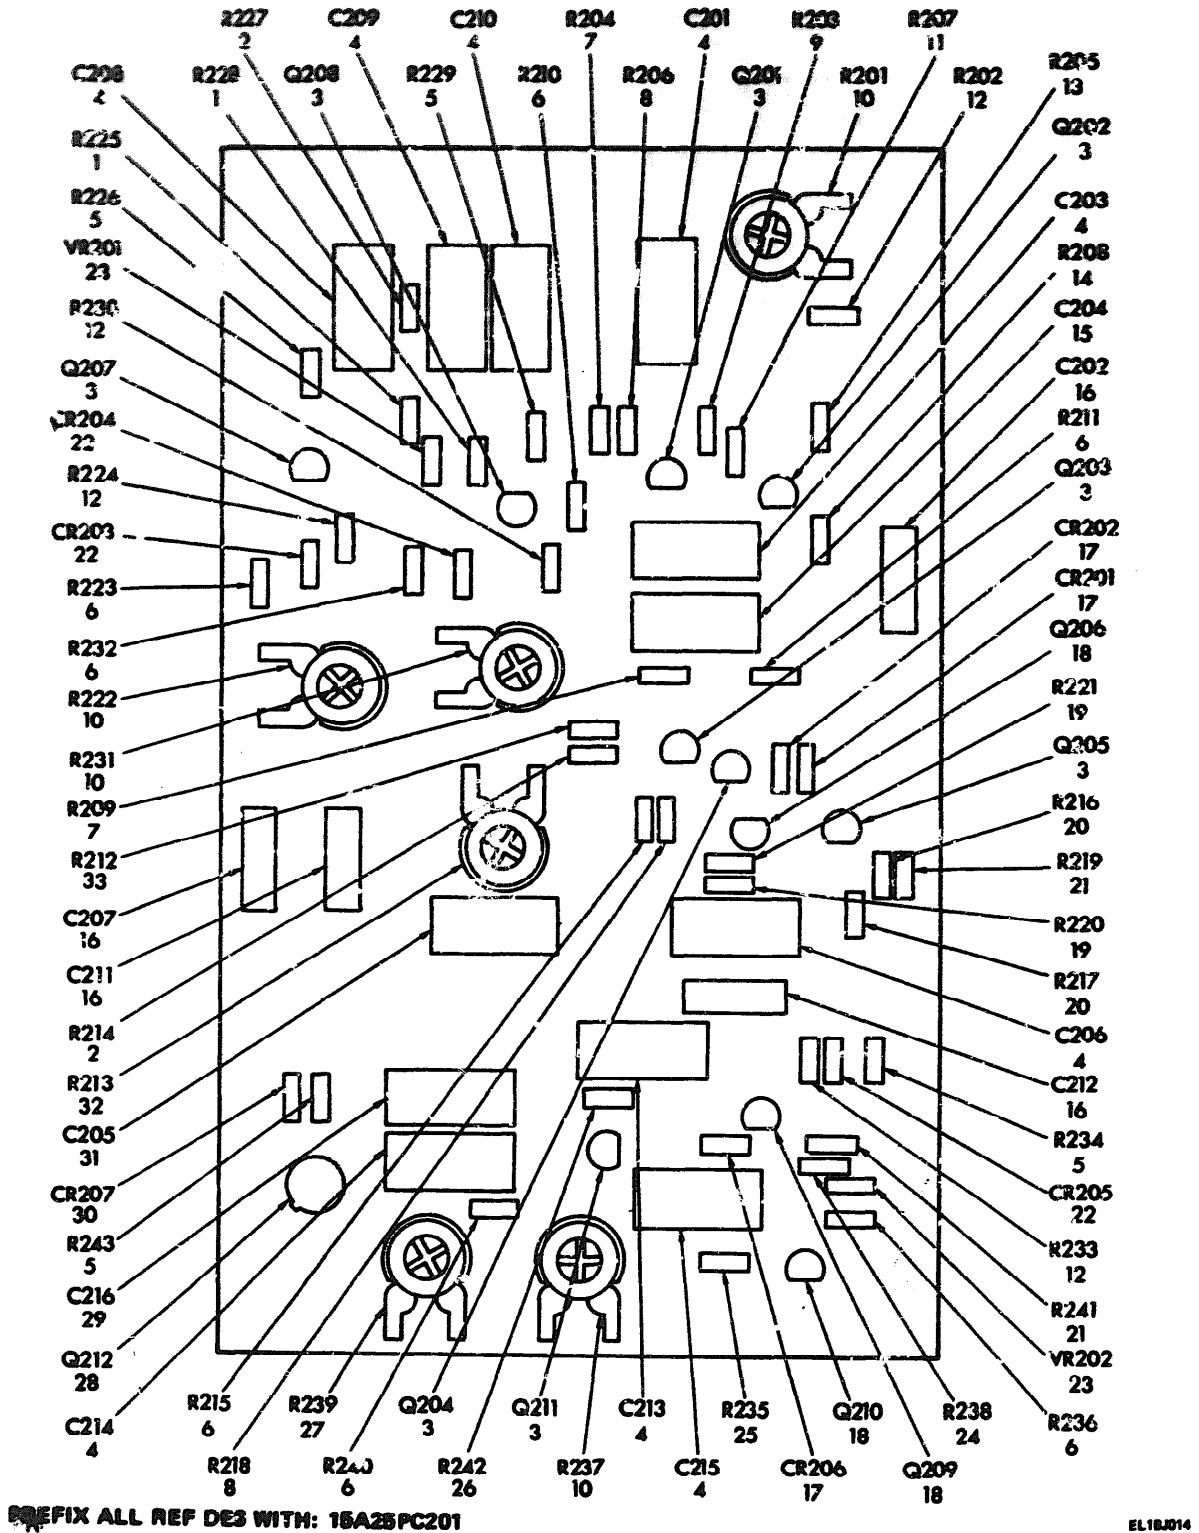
7. CIRCUIT CARD ASSEMBLY /PC201/
